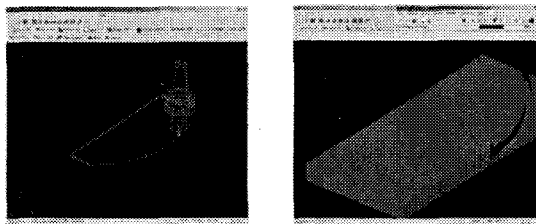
Process of machining using CAM software and Test machining using CAM software
